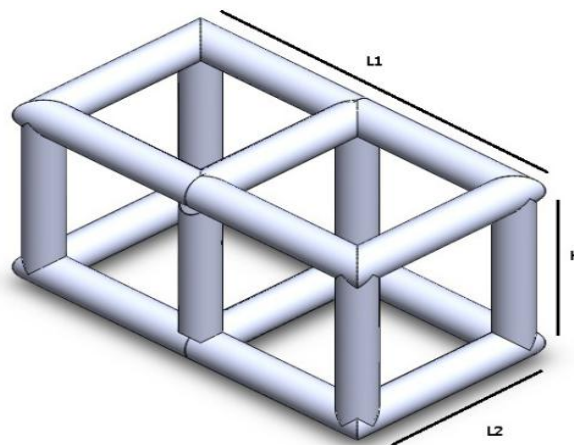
Rectangular box of welded tubes [41].
